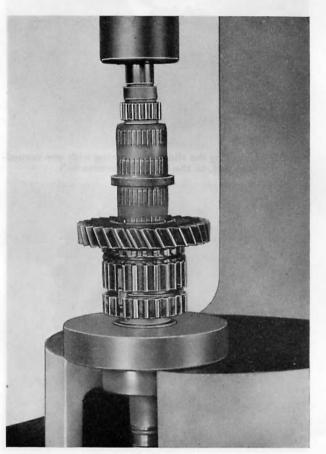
Pressing the first and reverse hub on to the mainshaft together with the synchronizing ring and first speed mainshaft gear (three-speed)
